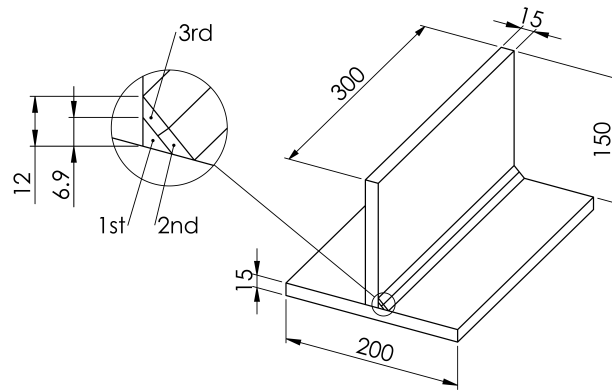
Prototype's geometry and welding sequence.
